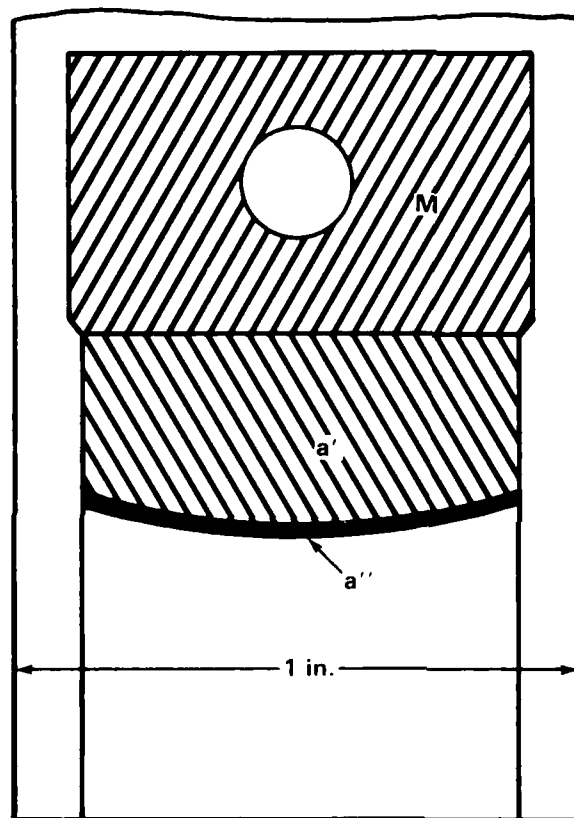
Details of Fracture Surfaces for a Severely Tested Specimen
